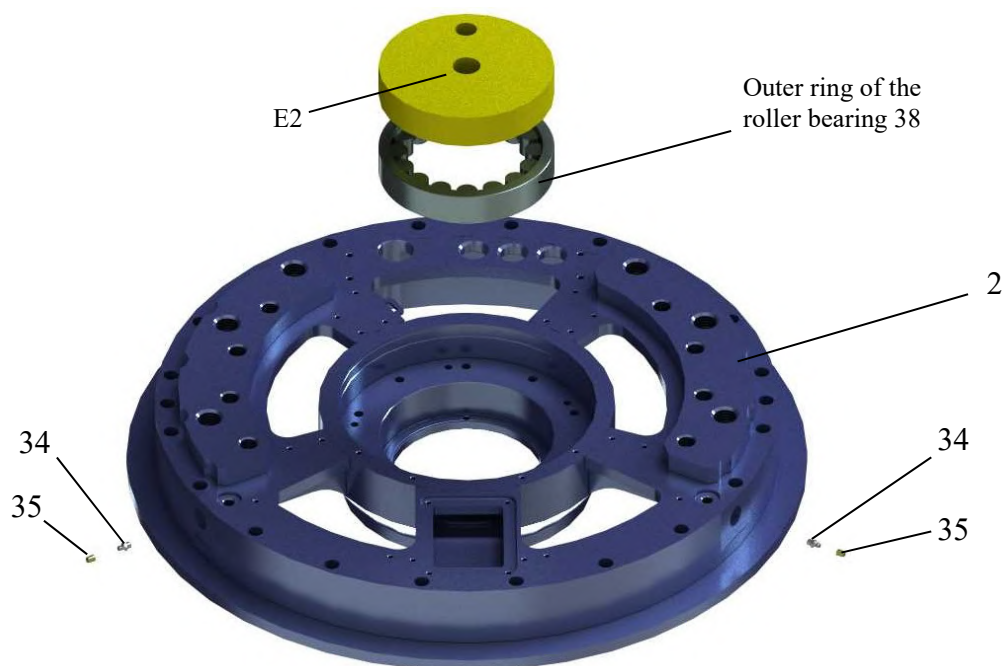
Installation of Roller Bearing into Bearing Shield on the Brake Side
